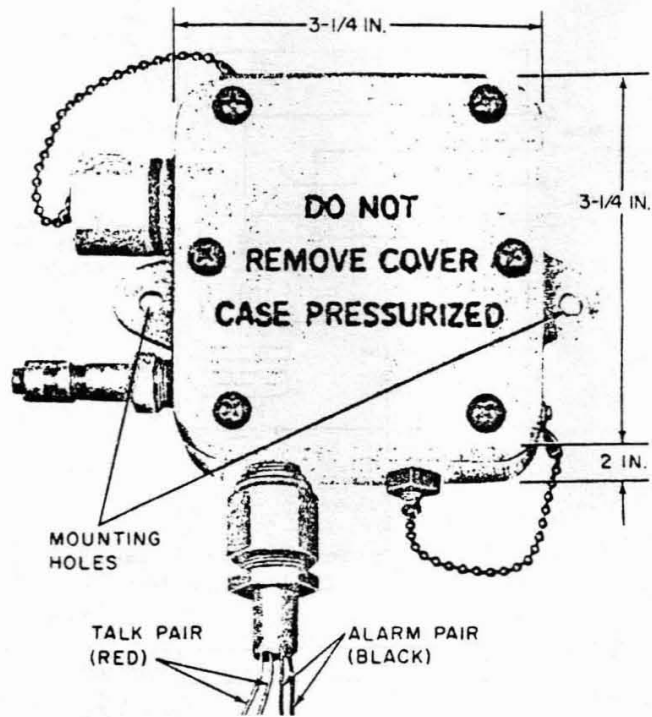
P Pressure Contactor (Maximum Dimensions)
